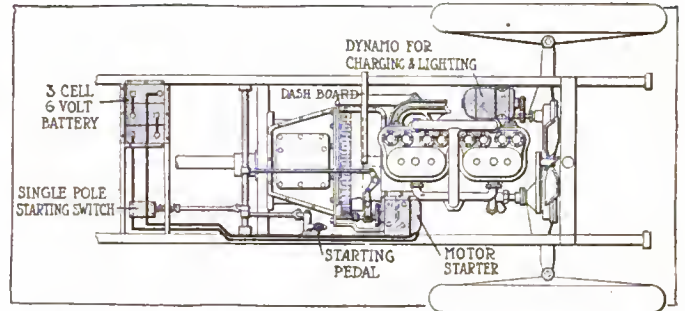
Gray and Davis Installation, showing wiring and location of parts
